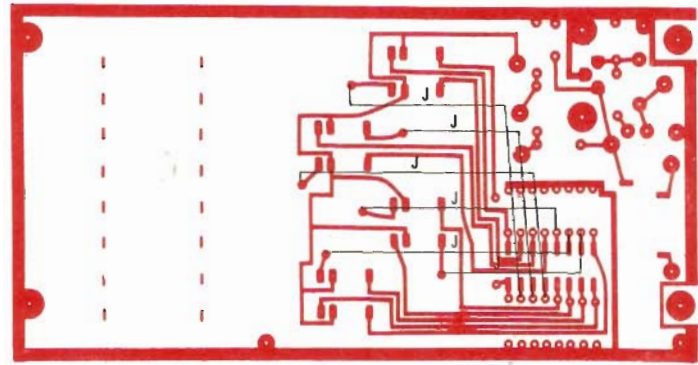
RUN SIX JUMPERS between the zero-insertion-force test socket and the appropriate pads on the component-side of the board.
